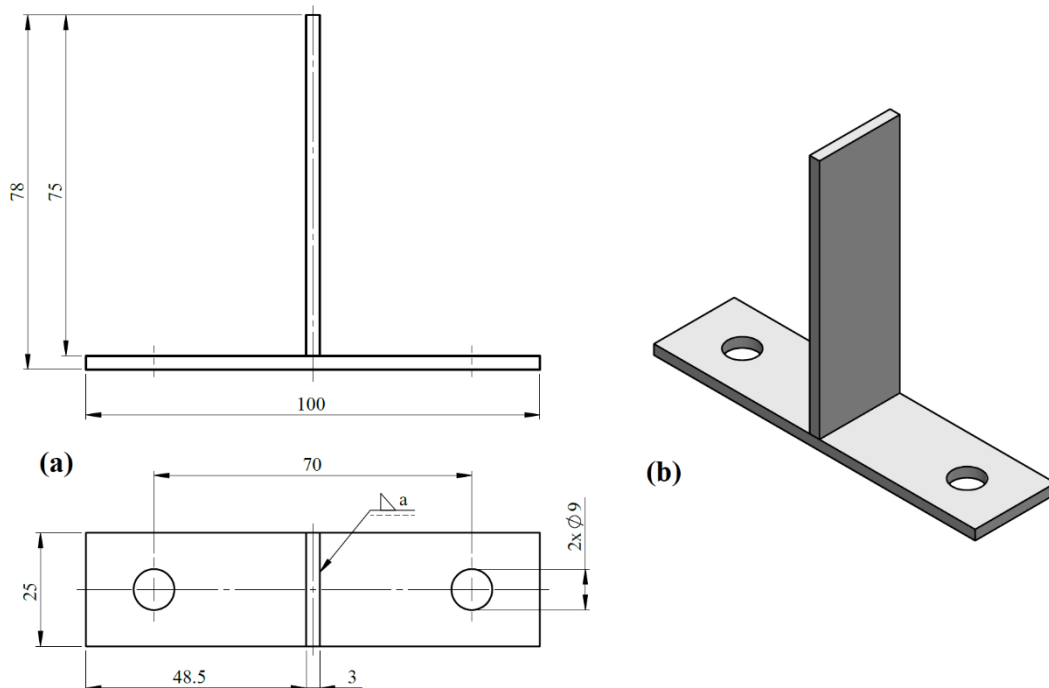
T-joint welded specimen geometry: (a) technical drawing, (b) isometric view
